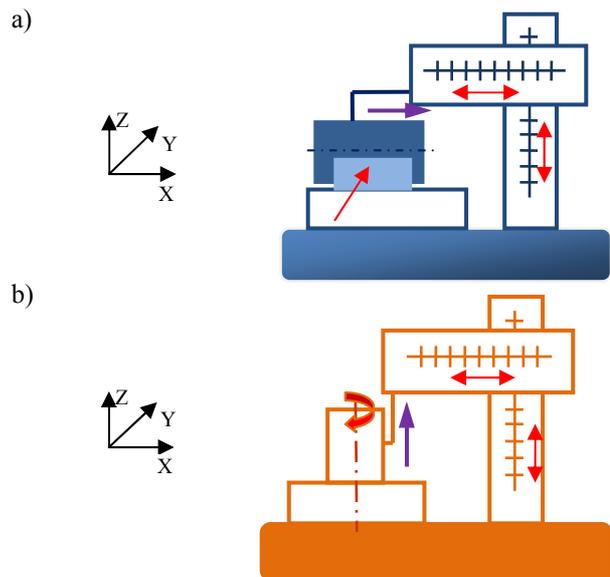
Specimen positioning: a) Form Talysurf PGI 830, b) Talyrond 365
